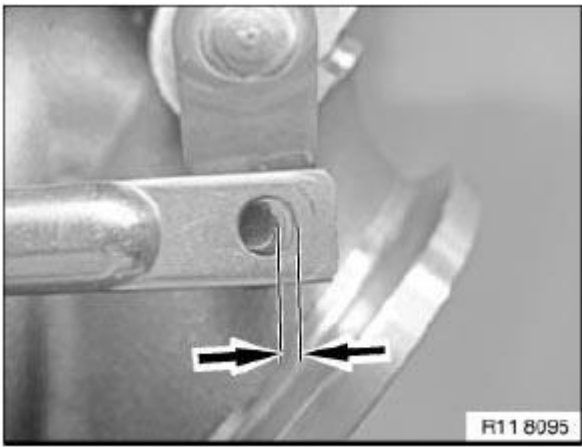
Identifying Gap Dimension Between Turnbuckle And Adjusting Lever
